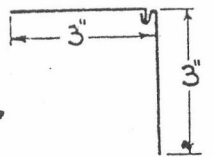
END VIEW OF POCKET SOLDER LOCK
